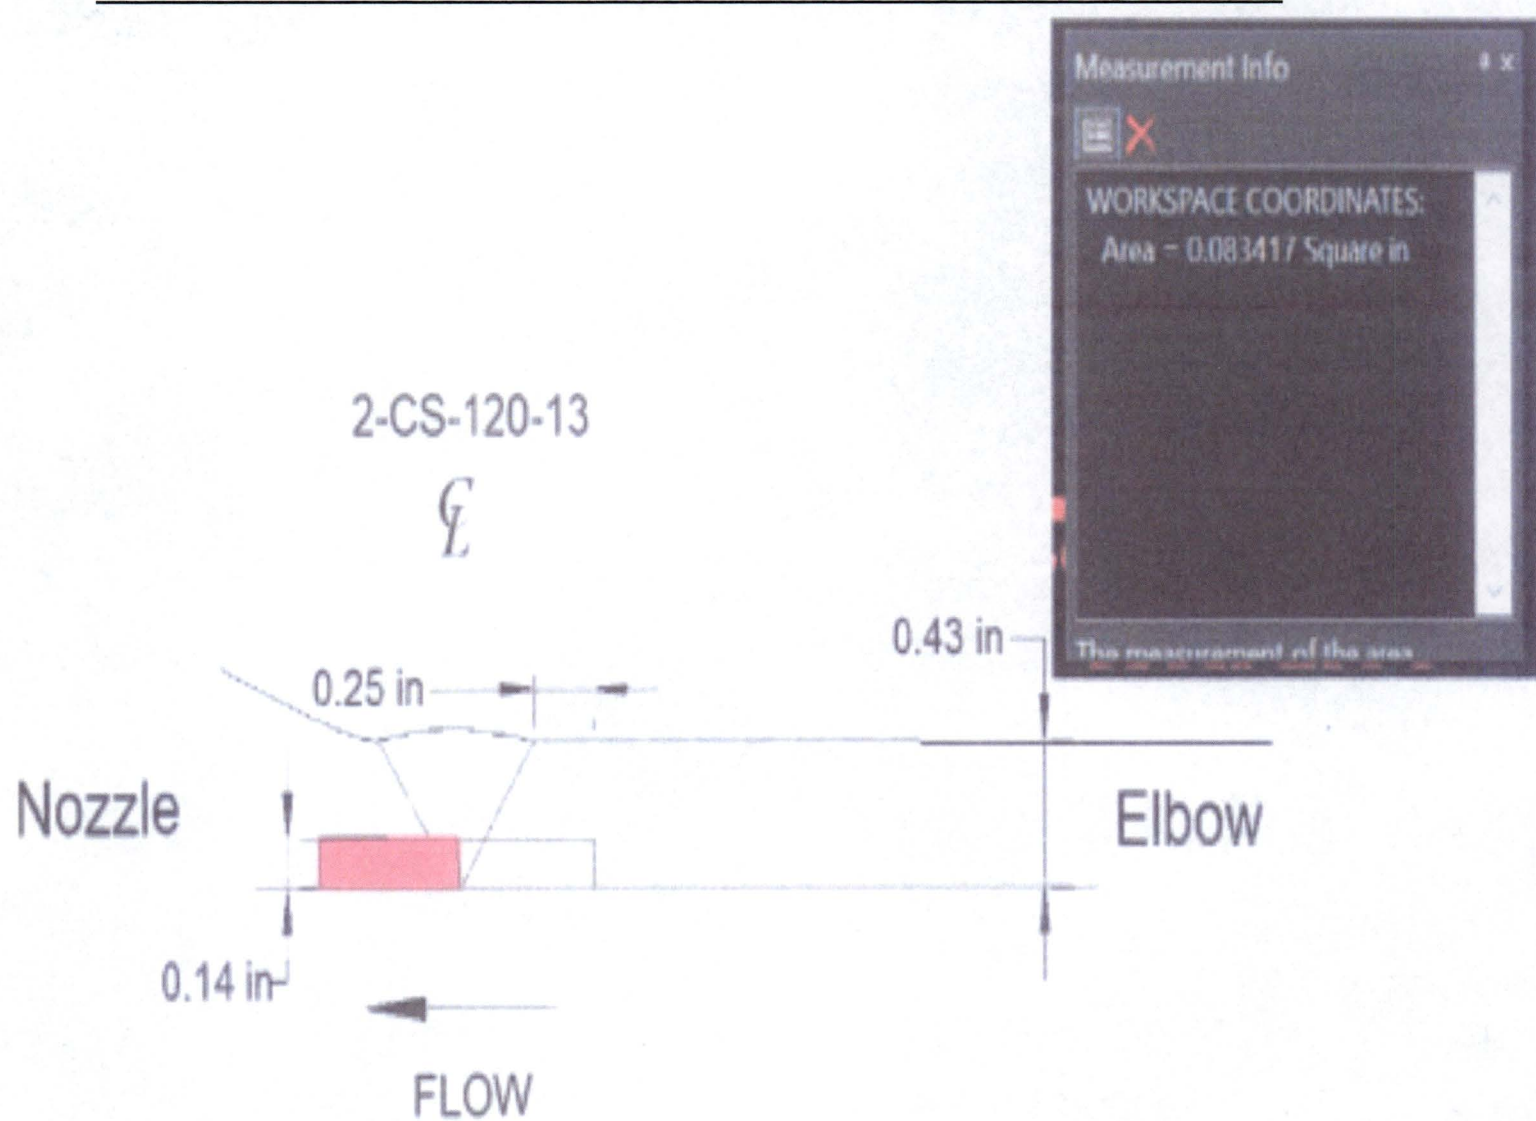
Weld 2-CS-120-13 (Extracted from Reference DRAWING 2A-72)
